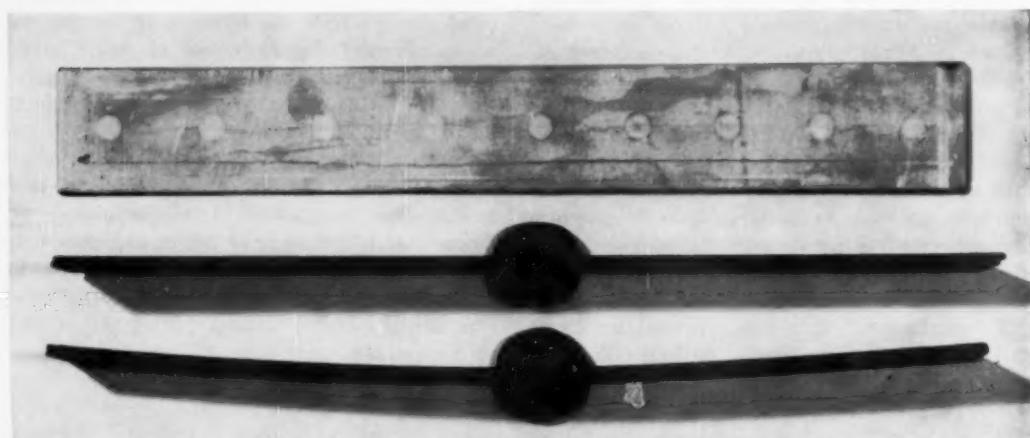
Bimetallic Strips of A-286 Spot Welded to 19-9 DL Before and After Heat Treatment. Though both materials have nearly the same expansion coefficients, density change in A-286 during aging causes strip to bend. Because of this, it is nearly impossible to weld A-286 to another metal before heat treatment
